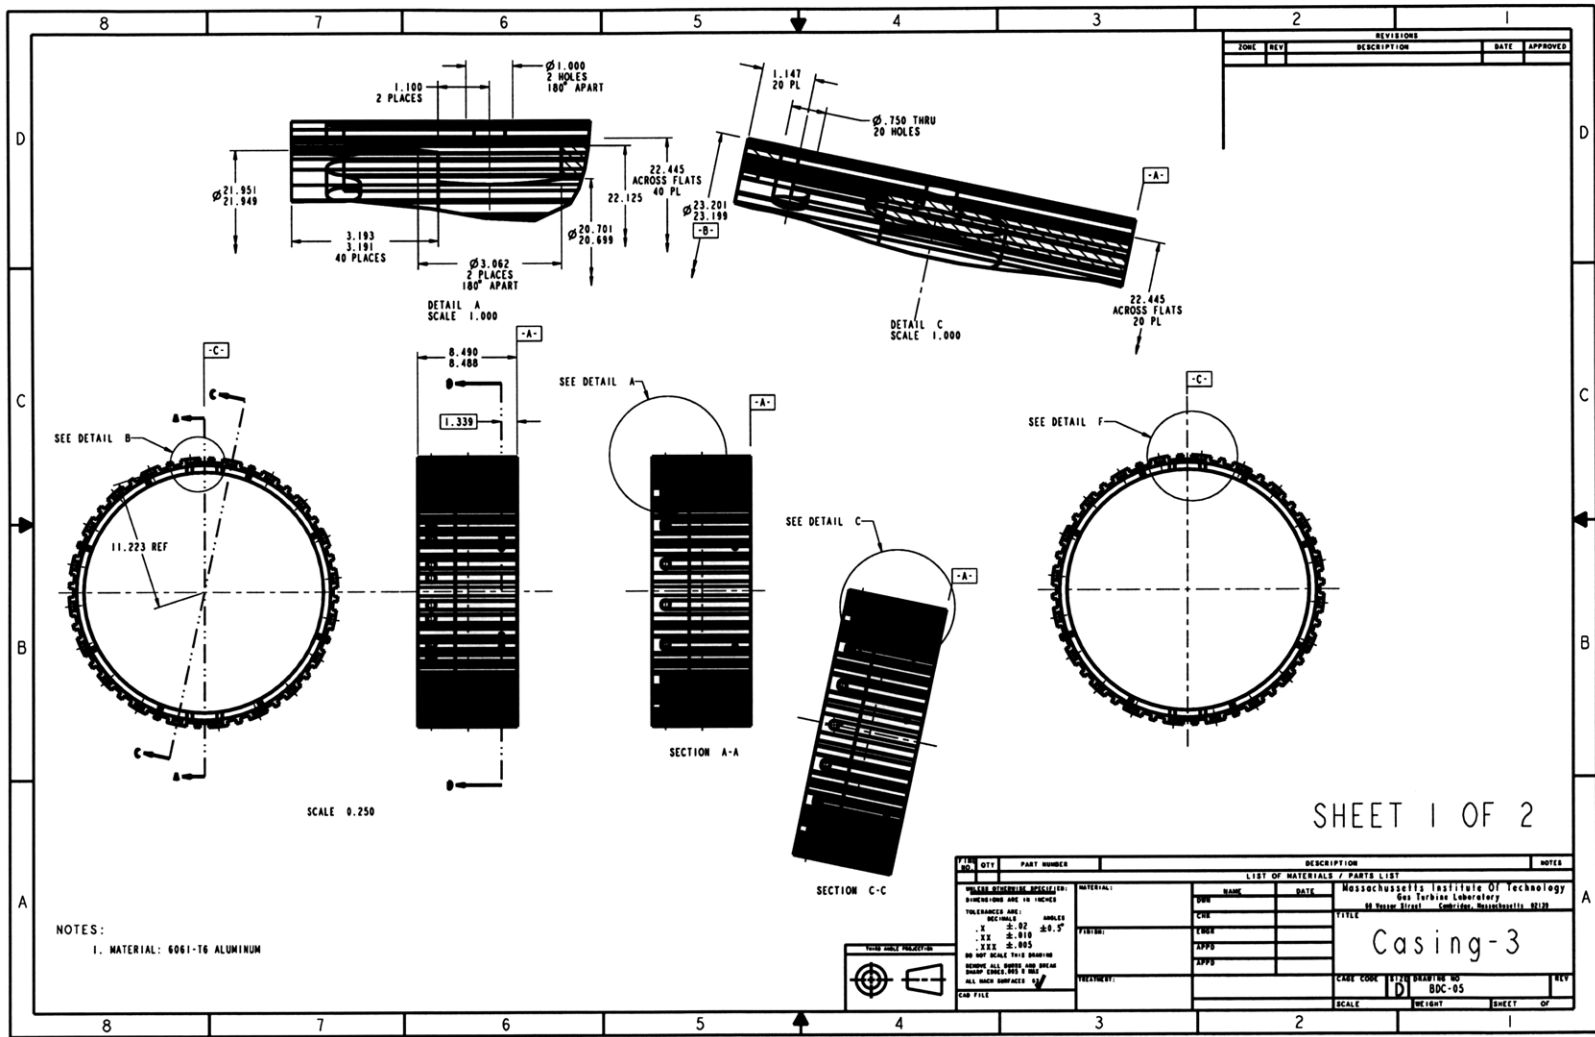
Engineering drawing of sheet 1 of Casing 3
